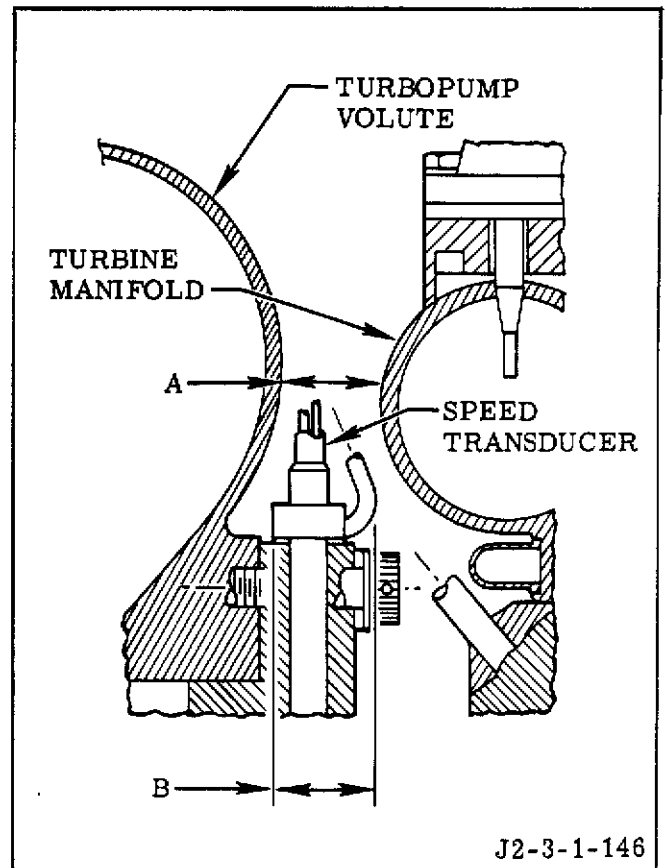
A. Installation of Fuel Turbopump Speed Transducer
